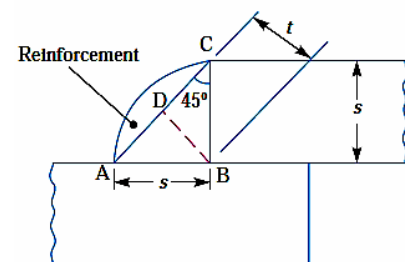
Enlarged view of a fillet weld.
